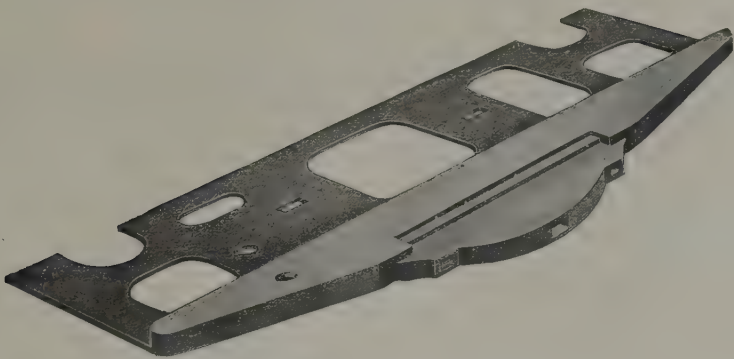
Commonwealth Steel Company's One-Piece Cast Steel Buffer Sill and Anti-Telescoping Plate for Non-Vestibuled Cars.
